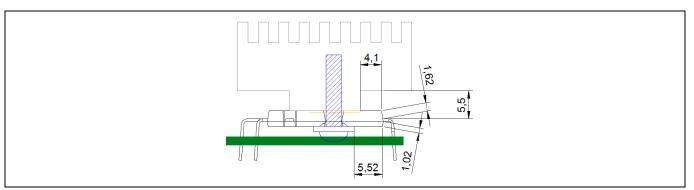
Recommended heat sink shape to get creepage and clearance distance between pins and heat sink (Dimension is symmetric)
